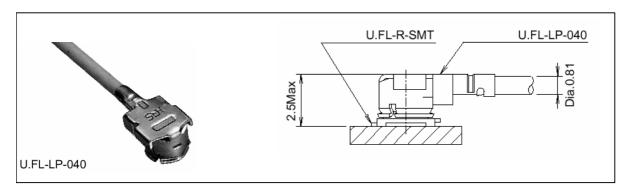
U.FL-R-SMT connector with U.FL-LP-040 plug
